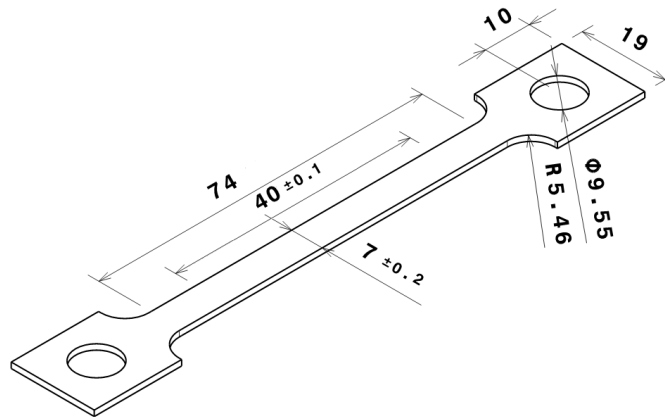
Geometry of the testing specimen (dimensions in mm)
